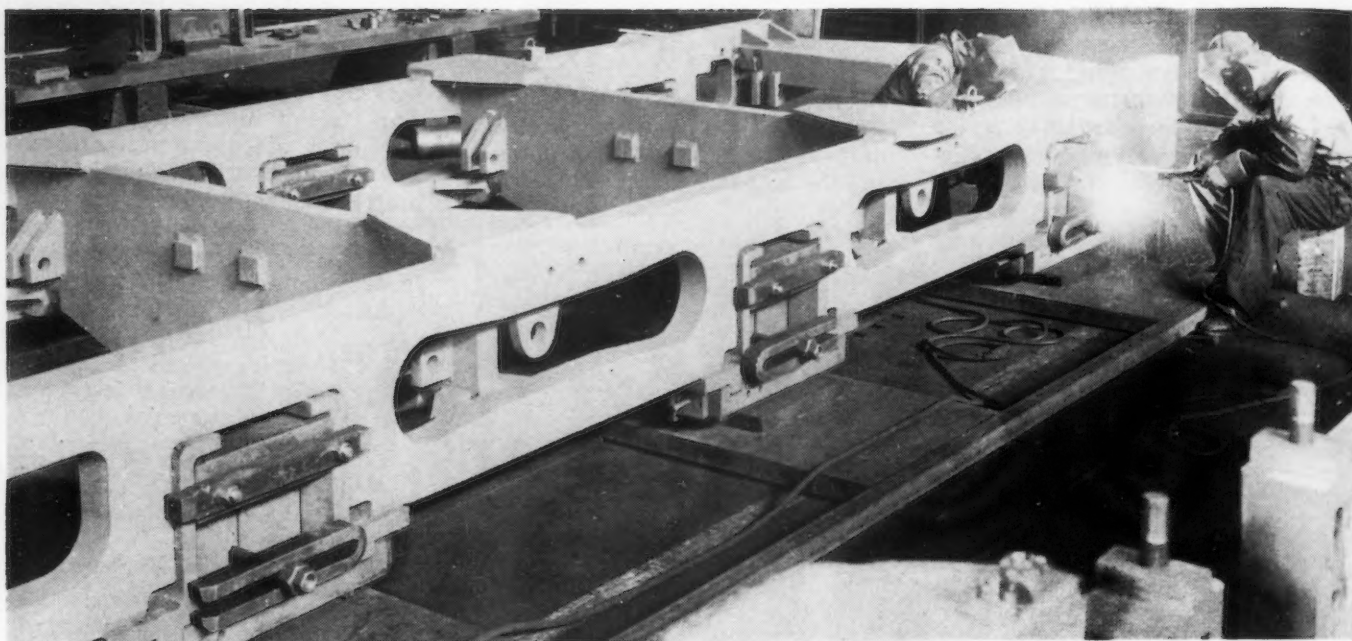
Locomotive truck frames, where high quality welds must be made in all positions, call for single operator d.c. arc welders.
